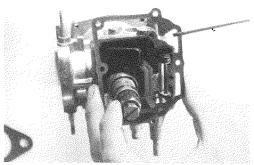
The float chamber gasket should be fitted with this tag as shown, otherwise it will foul the needle valve
